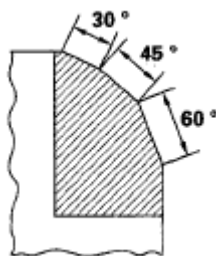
Identifying Upper And Lower Edge Angle Of Seat
